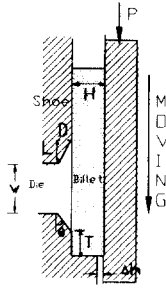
Proposed die shape for removing surface defect formation
